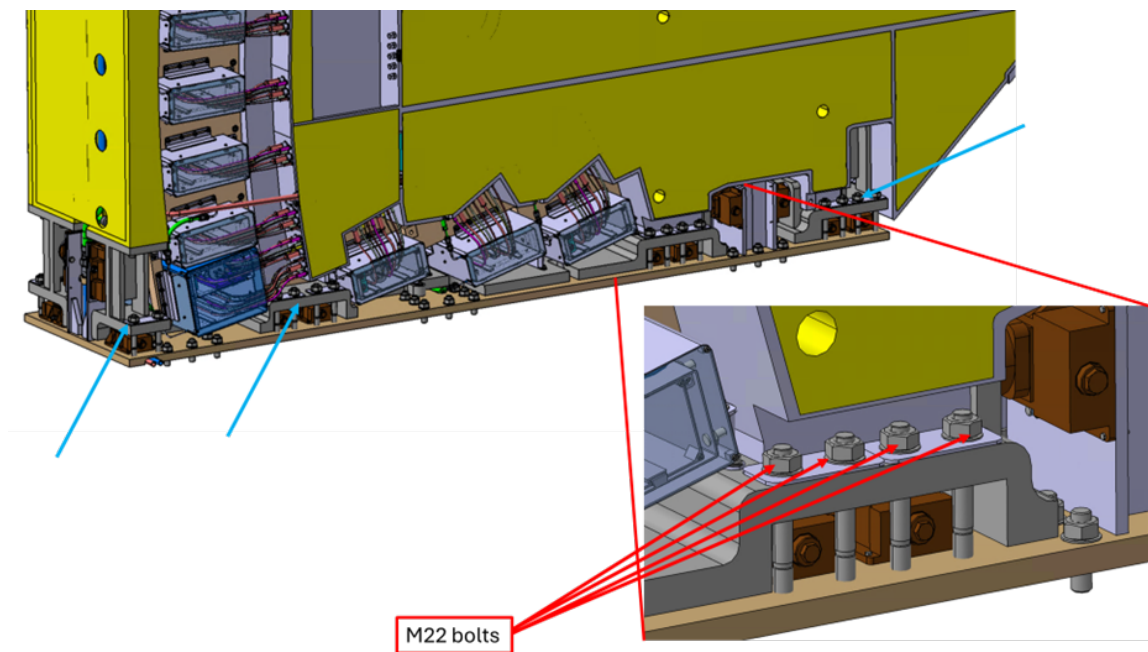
Detail of 4 (out of 28) M22 connection bolts between Ex-Port RNC and Counterplate ([86]).
